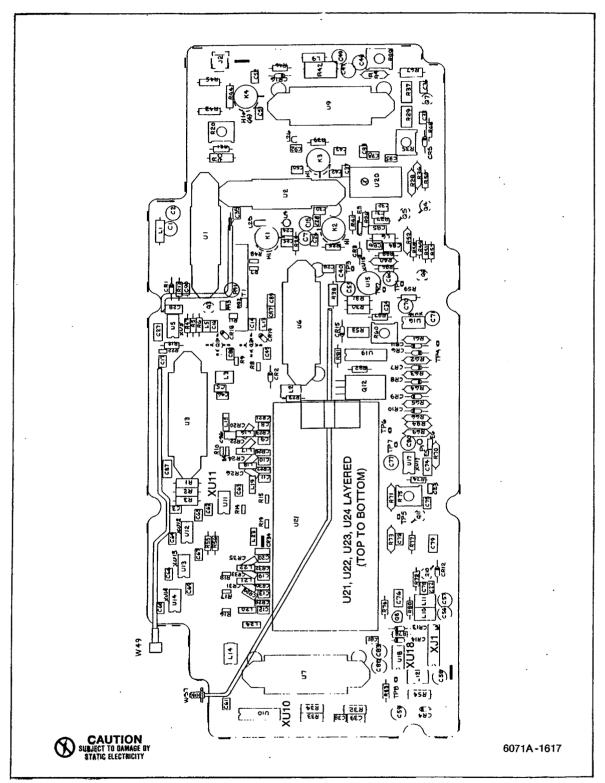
A4A6 X2 Output Amplifier PCB Assembly (6071A)
